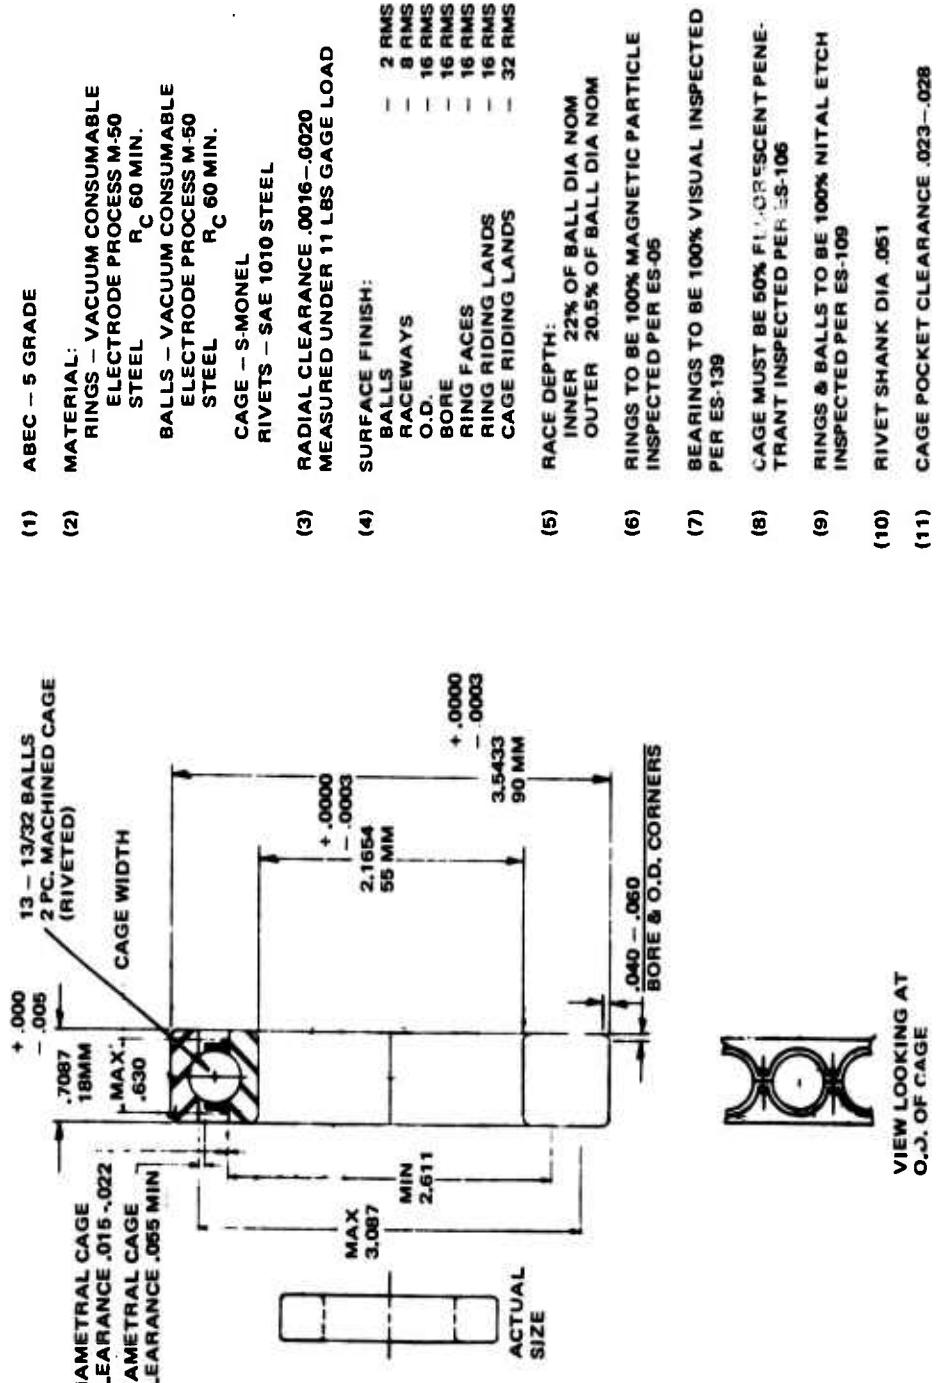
Machined Inner-Land-Riding S-Monel Cage, Design 1.
